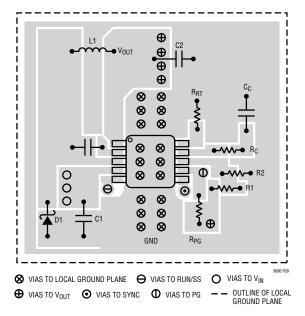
A Good PCB Layout Ensures Proper, Low EMI Operation
